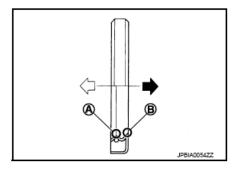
Identifying Rear Oil And Dust Seal Lip Courtesy of NISSAN NORTH AMERICA, INC.
